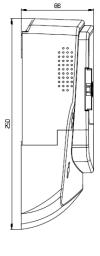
Overall and fixing dimensions of an MT372 meter fitted with a long terminal cover
